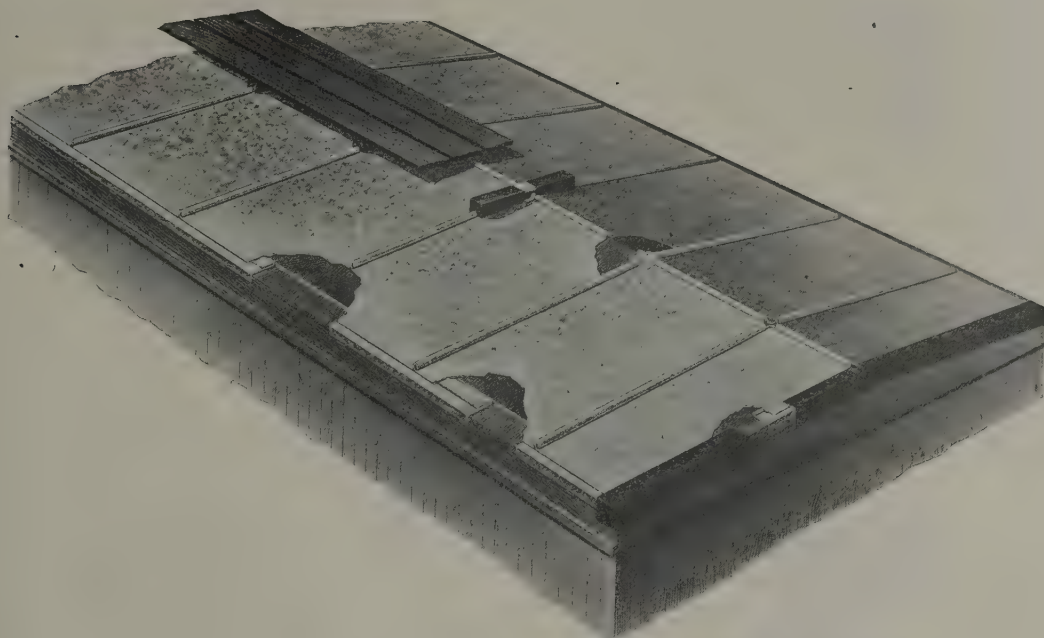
Improved XLA Flexible Roof. Standard Railway Equipment Company.
